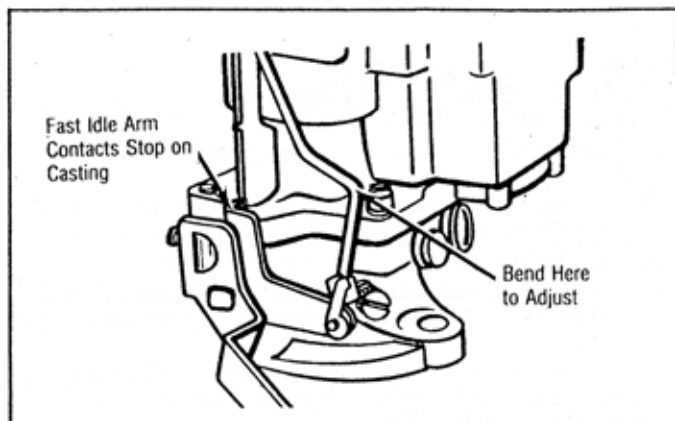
Fast Idle Linkage Adjustment (Type B - If Equipped)
